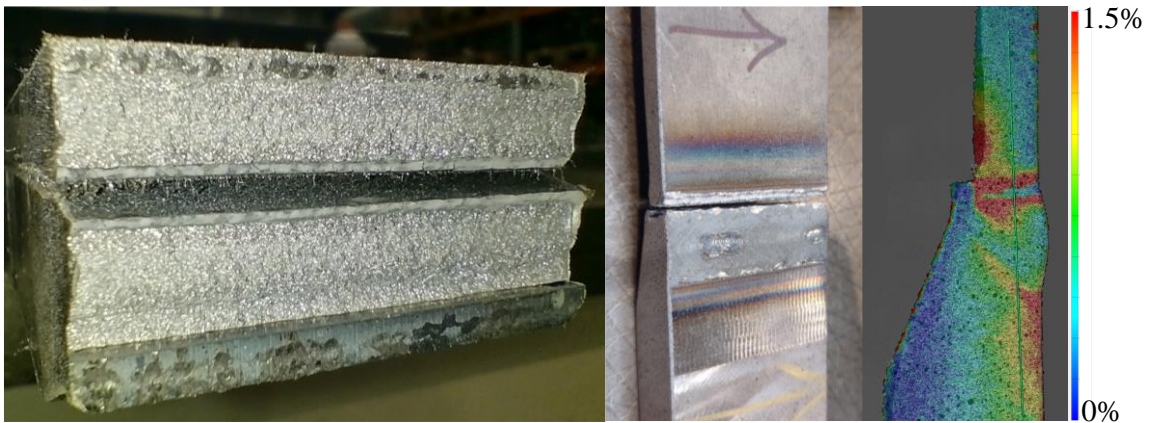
The brittle fracture at 70G20_S1 specimen. Failure happened fusion line between the weld and S700 plate. Two high strain lines can be detected in the weld area, one on fusion line where failure happened and other is at the outer HAZ region.
